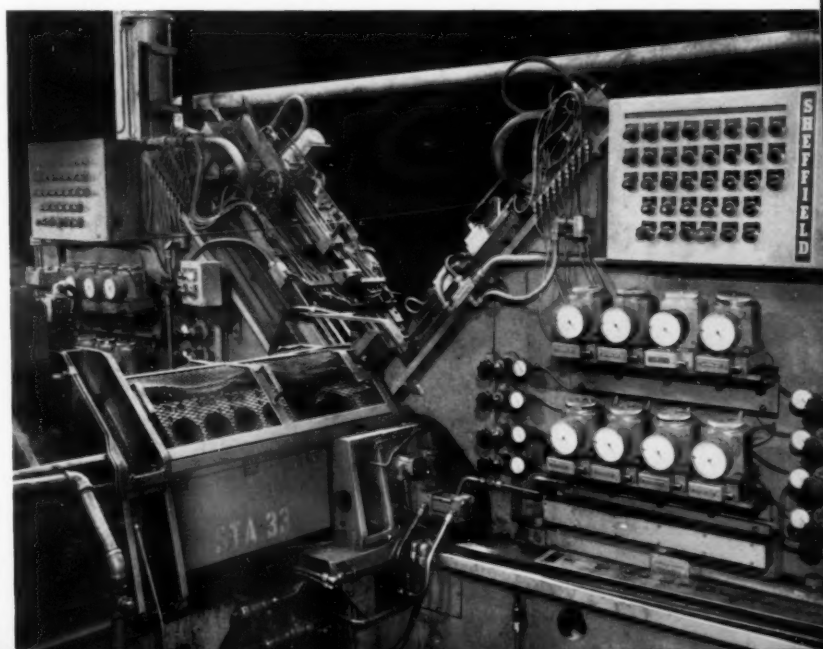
Finish-bored crank holes and the babbitt cam liners are inspected with this gaging unit. Blocks are classified by marking with various color paints.
